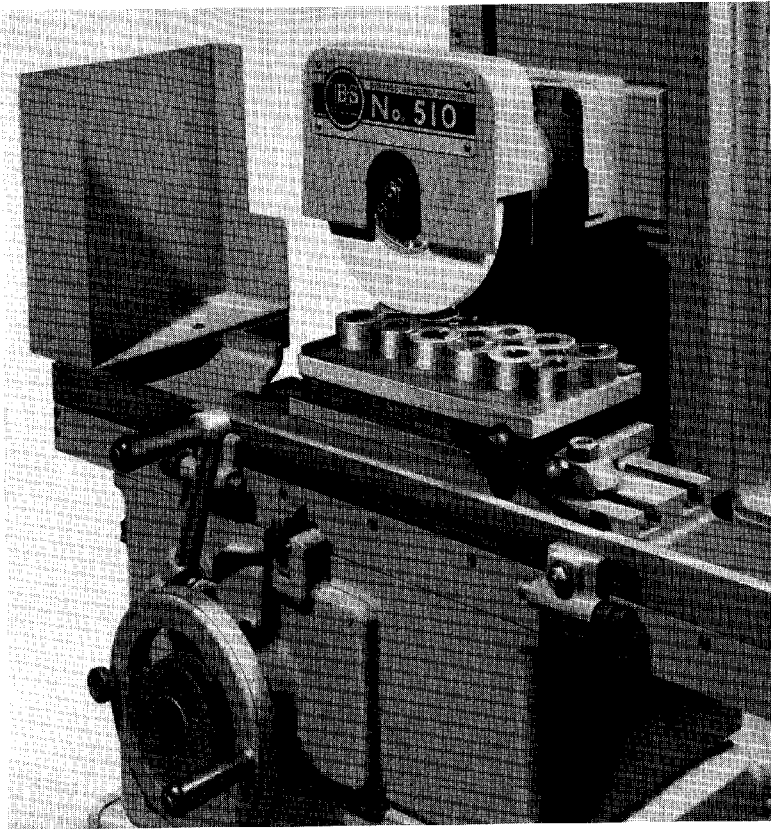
A representative production job-grinding the surfaces of twelve pieces with one loading of the permanent magnet-type chuck.
